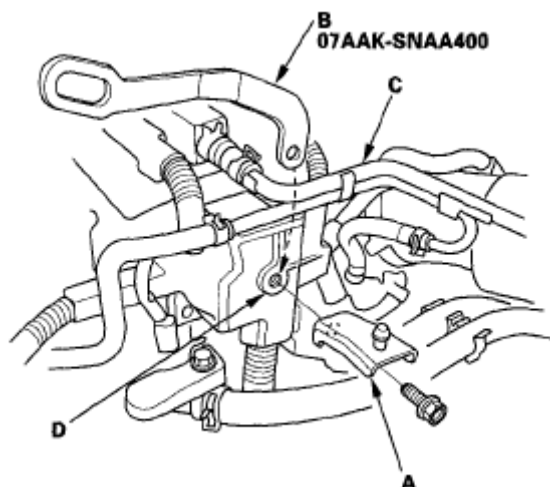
Identifying Air Cleaner Housing Mounting Bracket And Support Eyelet
